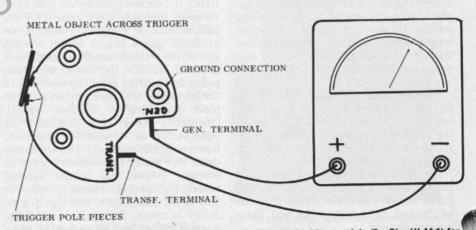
Drawing showing volt-chmmeter connections to ignition module (3 — Fig. HL44-1) for checking module. It should be noted that this is not a conclusive test and module should be renewed in event of spark failure when other magneto components test OK.
